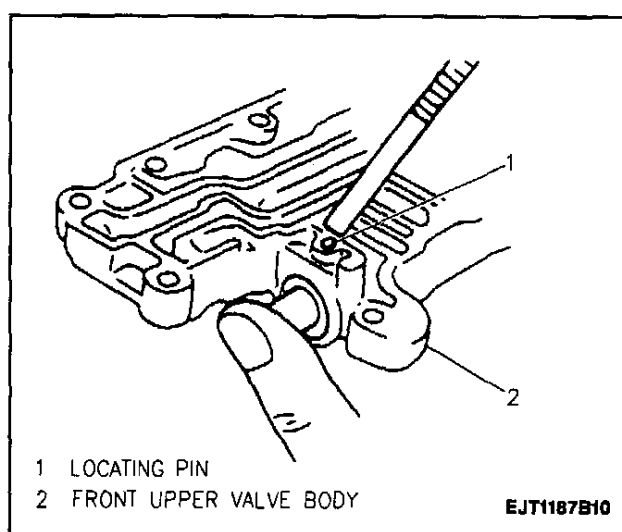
Removing Throttle Valve Locating Pin (03-72LE, 4-Speed)
